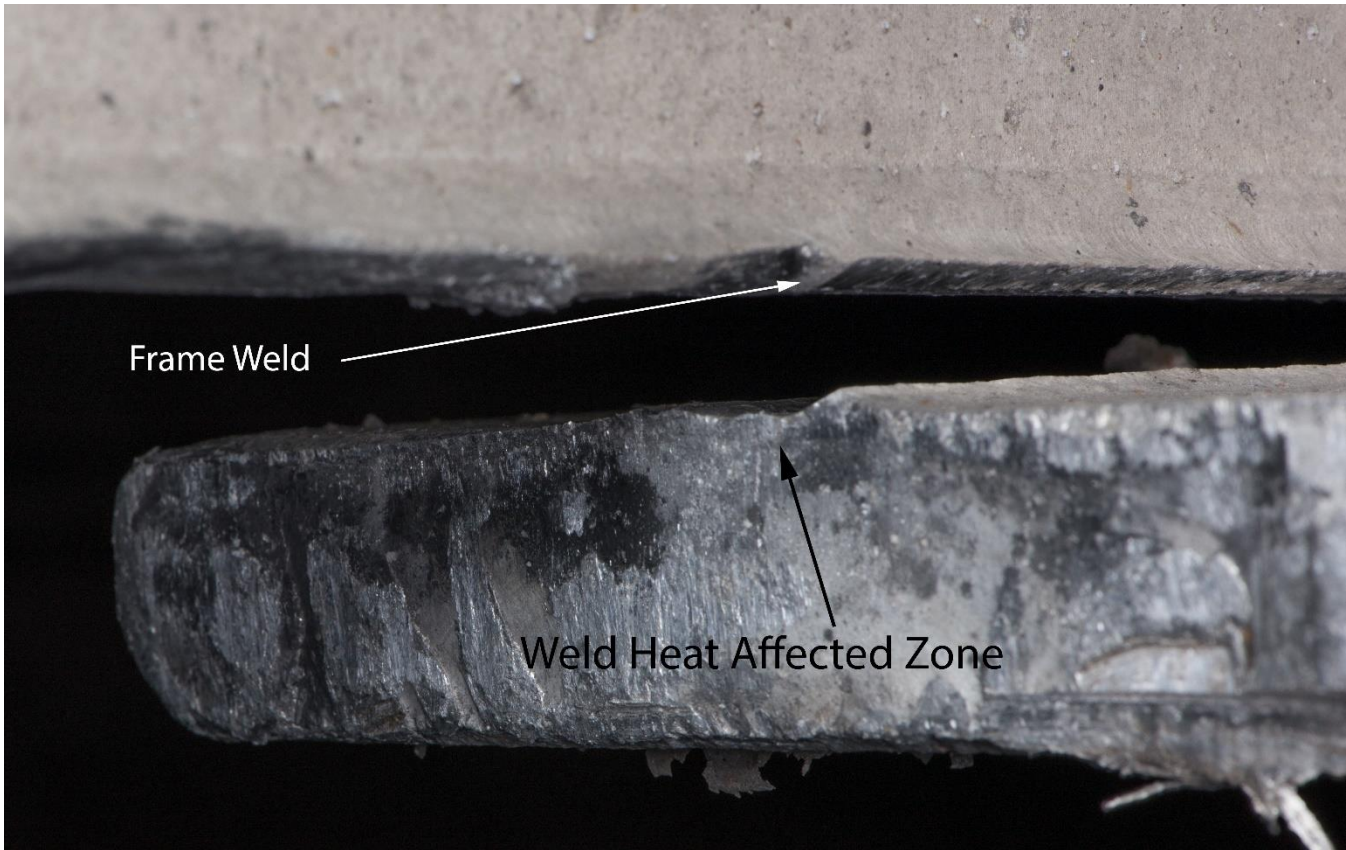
Weld Failure in Frame-Flange Weld HAZ
